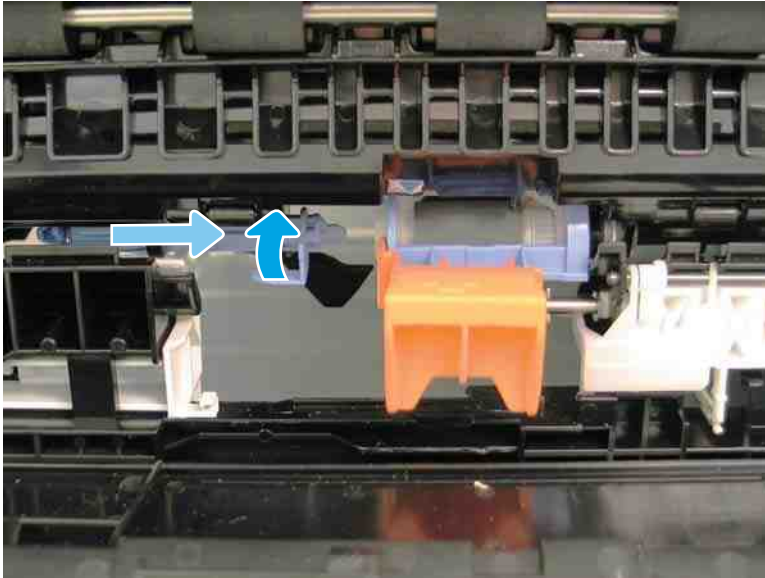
Correctly install the white hook onto a sheet metal plate
